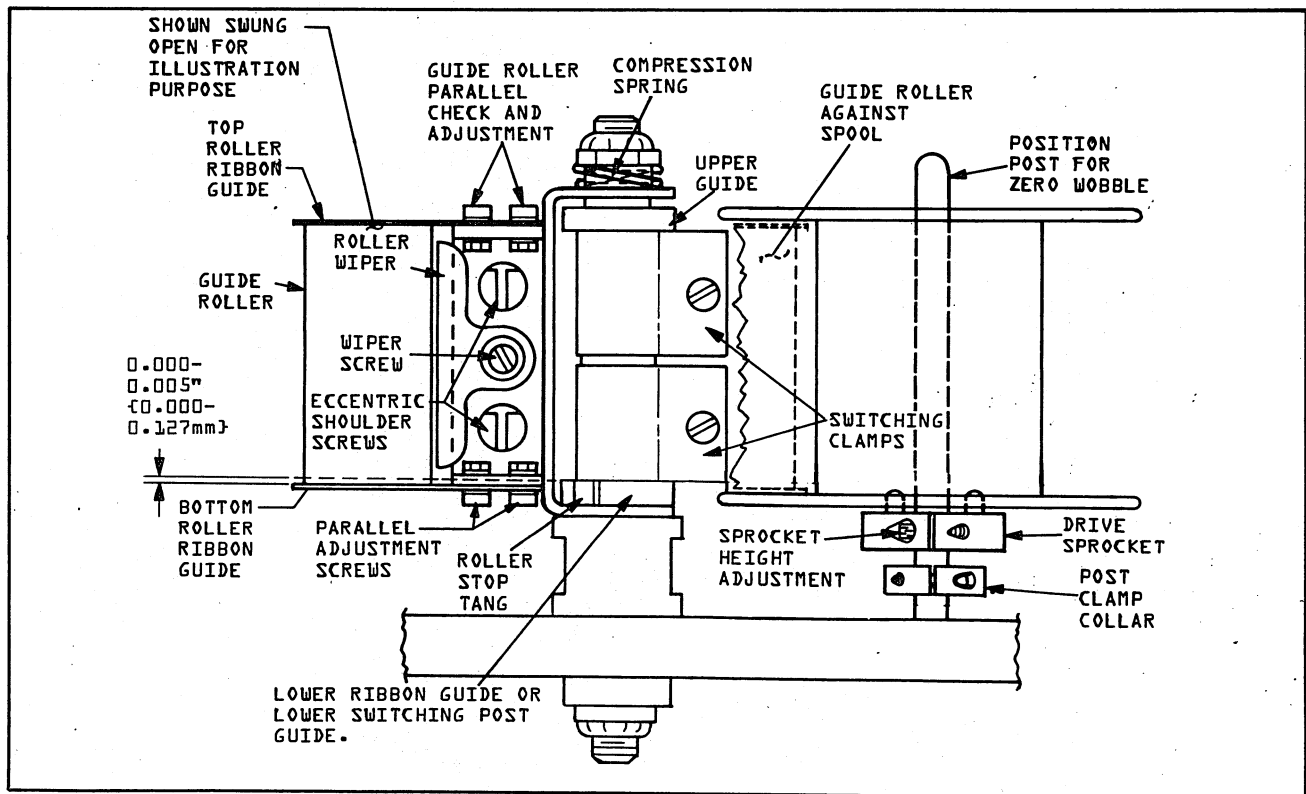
D. ROLLER SWITCHING POST ASSEMBLY
